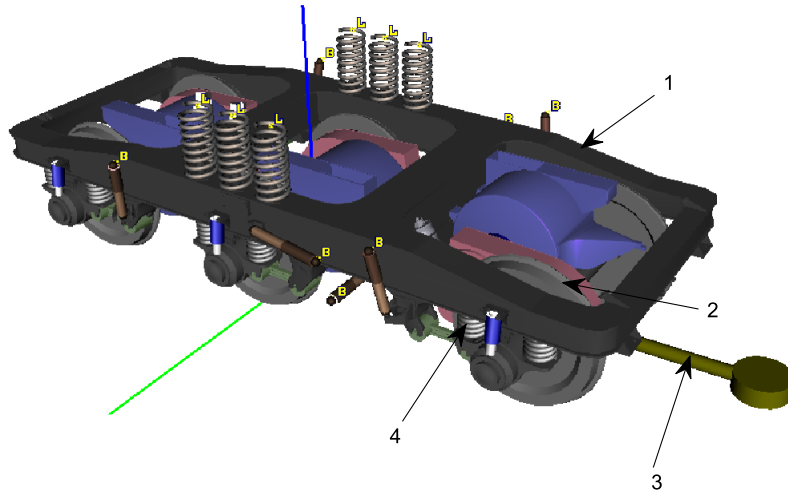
Bogie model: Bogie frame (1), wheelset with motoring assembly (2), traction rod (3), primary suspension (4)
